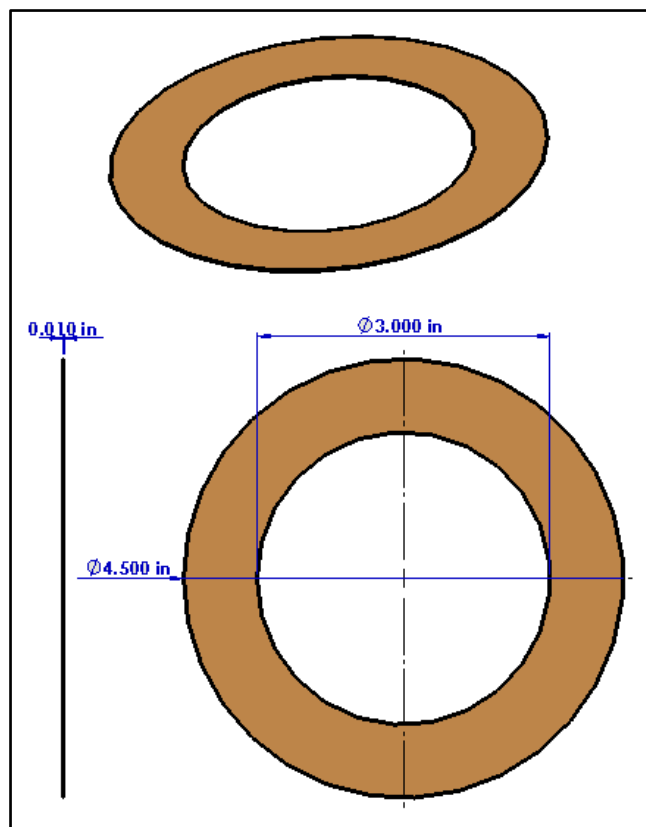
Piezoelectric Shaker Table Electrode Component Dimensions
